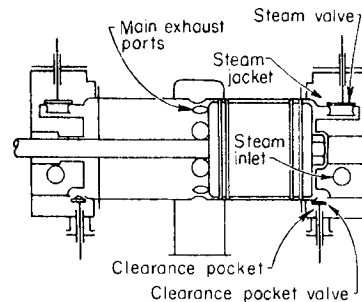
Condensing uniflow engine cylinder, with clearance pockets.
